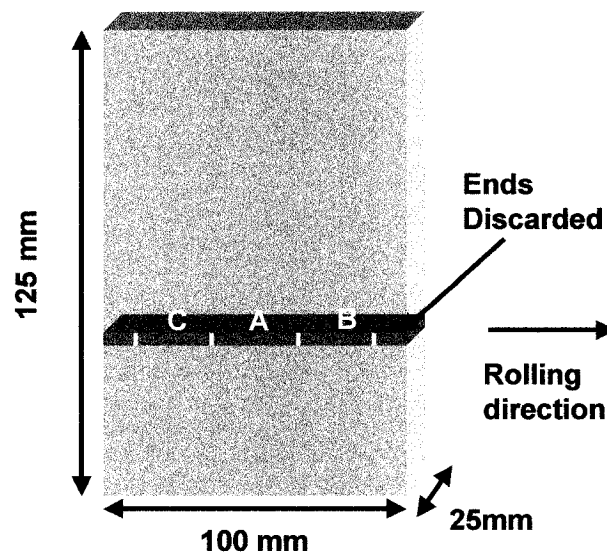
Schematic representation of the thick plat showing the location and dimensions of the rolling specimens
